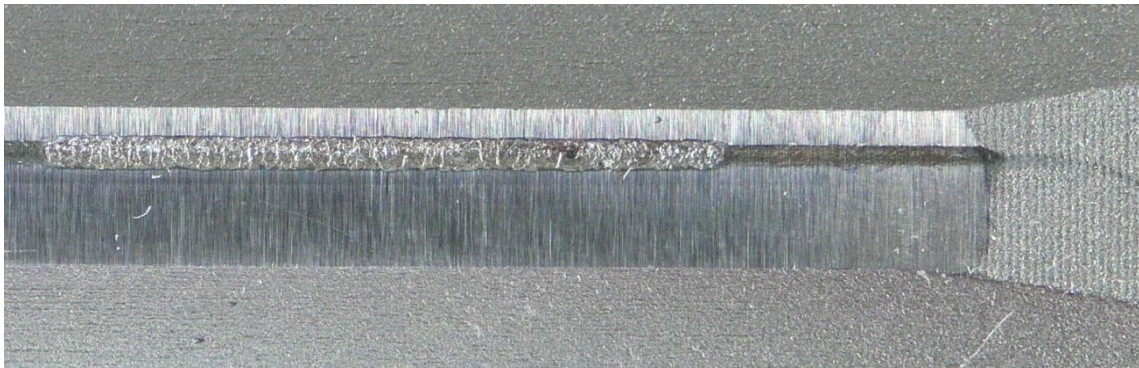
Flaking of outer sleeve raceway surface of linear bush with ball retainer (straight)
